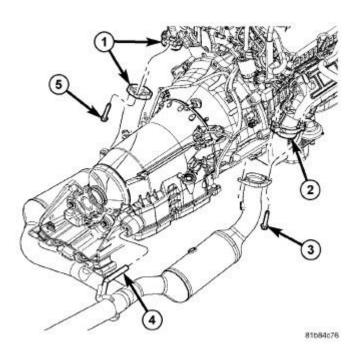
Exhaust Pipe To Manifold With Fasteners Courtesy of CHRYSLER LLC
